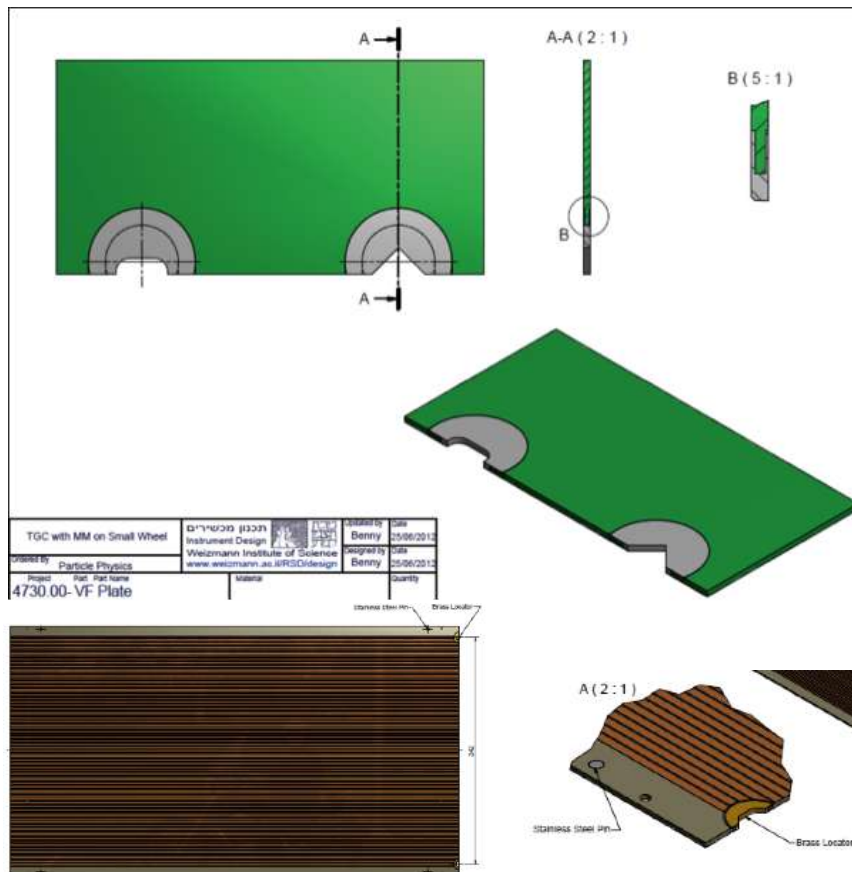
Schematics of the brass inserts to be glued to the strip cathode board as well as the stainless pin for x-ray positioning, to be machined together with the strips.
